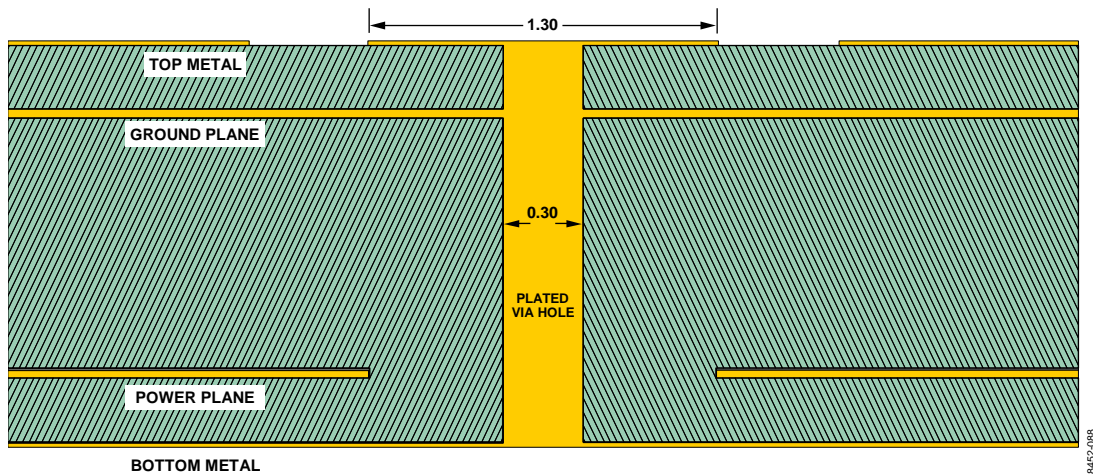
Cross-Section of 4-Layer PCB Showing Thermal Via Connection to Buried Ground Plane (Dimensions in Millimeters)
